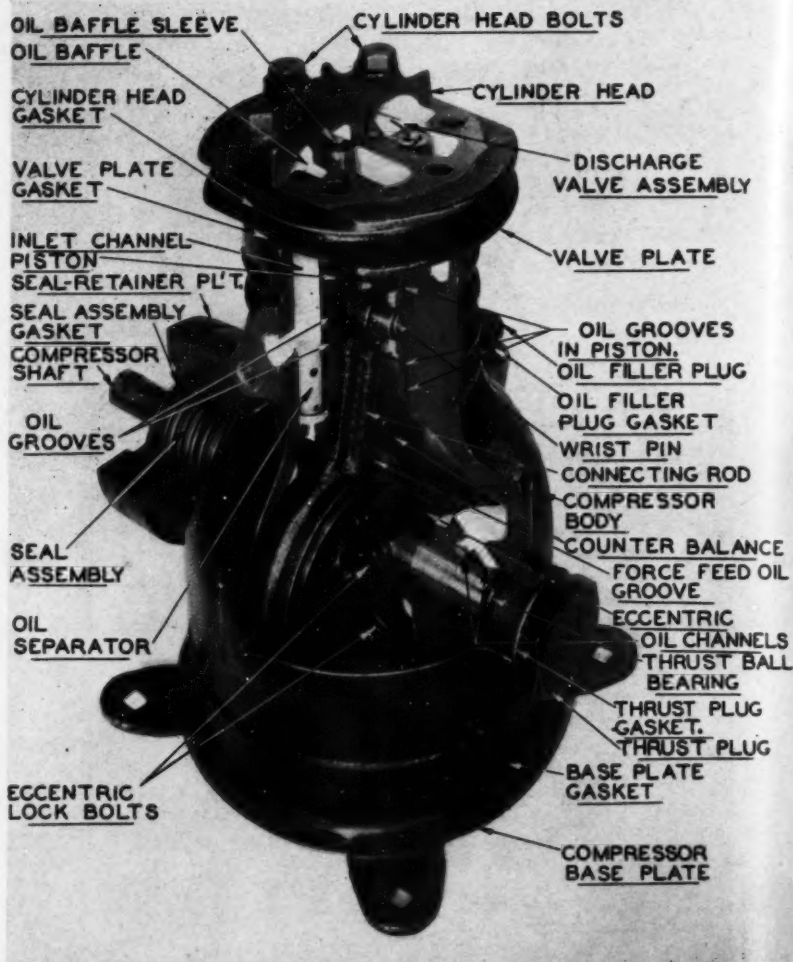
CUT-AWAY VIEW OF THE FAIRBANKS-MORSE SINGLE CYLINDER COMPRESSOR
